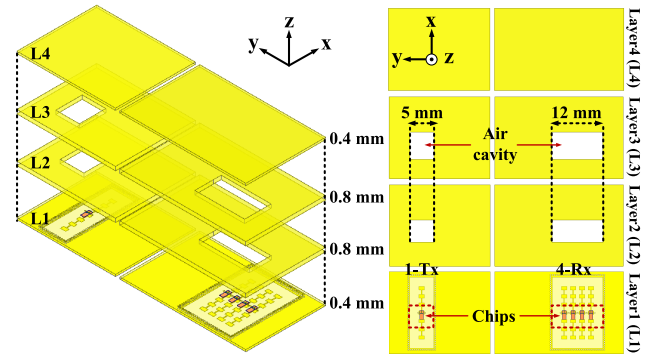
Exploded view and detailed description of the proposed radar board packaging.
